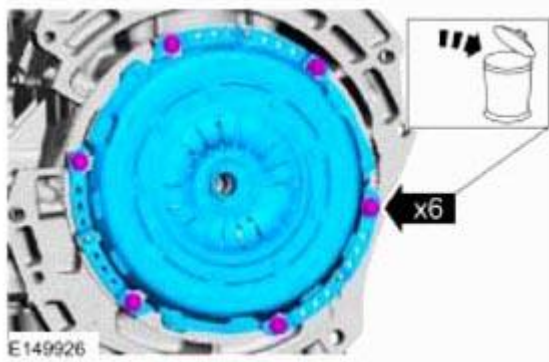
Locating Clutch Pressure Plate-To-Flywheel Bolts
